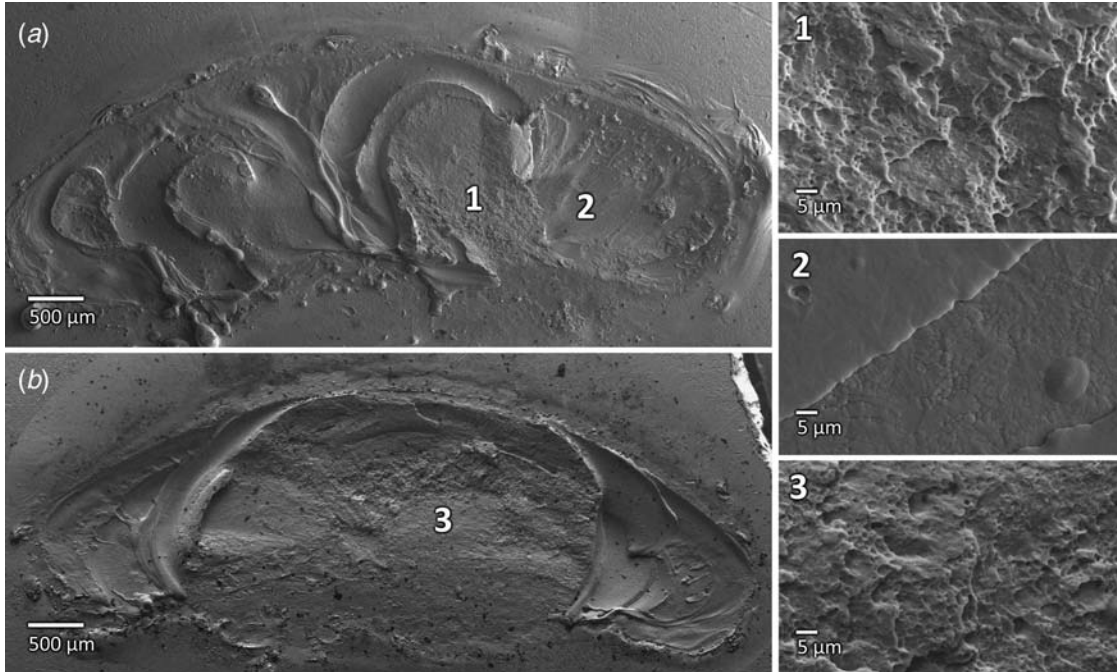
SEM images of fractured DP600 sheets welded with class III Cu electrodes after torque testing with weld numbers of (a) 1000 and (b) 7000
